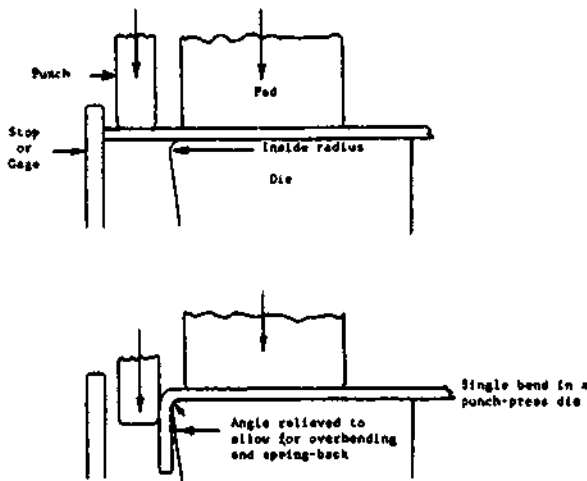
D1-2 Bending sheet metal with a punch press wiper die. (from Niebel, *Product Design and Process Engineering*, McGraw-Hill, NY 1974)
